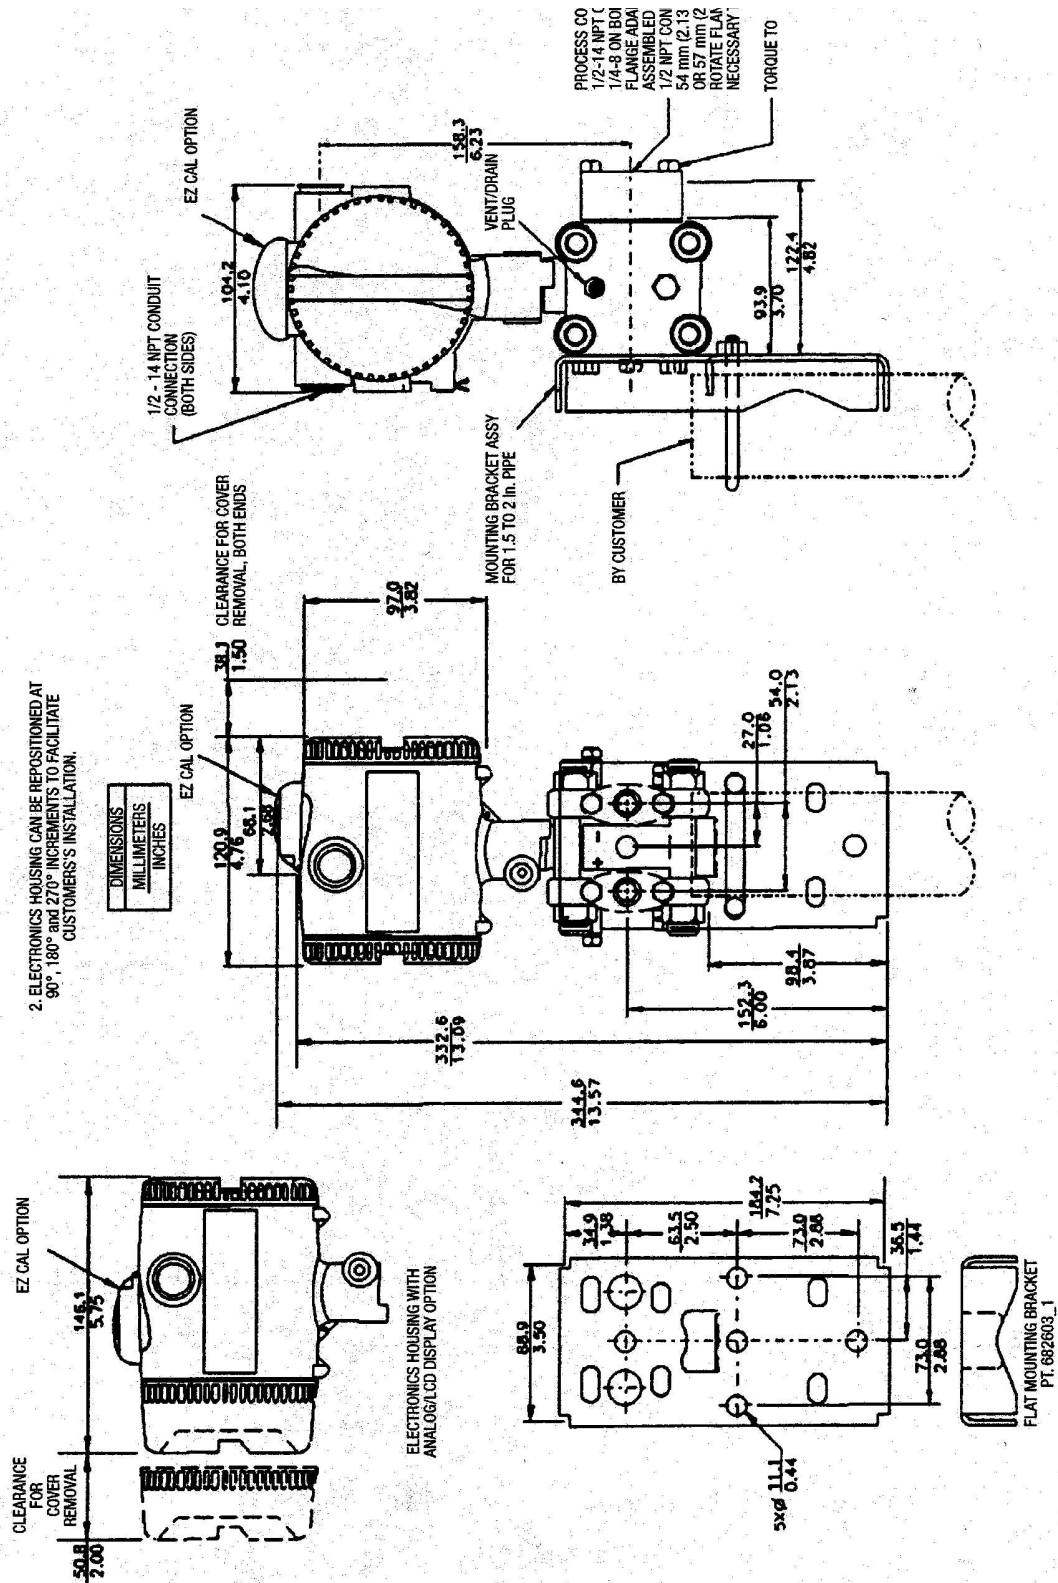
External and Mounting Dimensions for Type PTHP Pressure Transmitter
